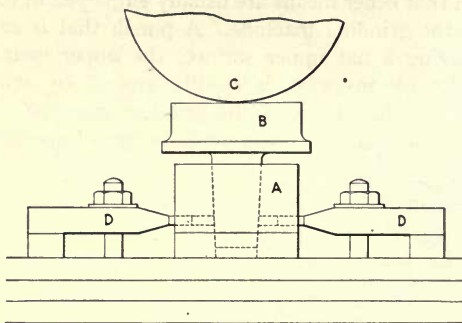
Fixture for holding tapered-shank punches for grinding.
